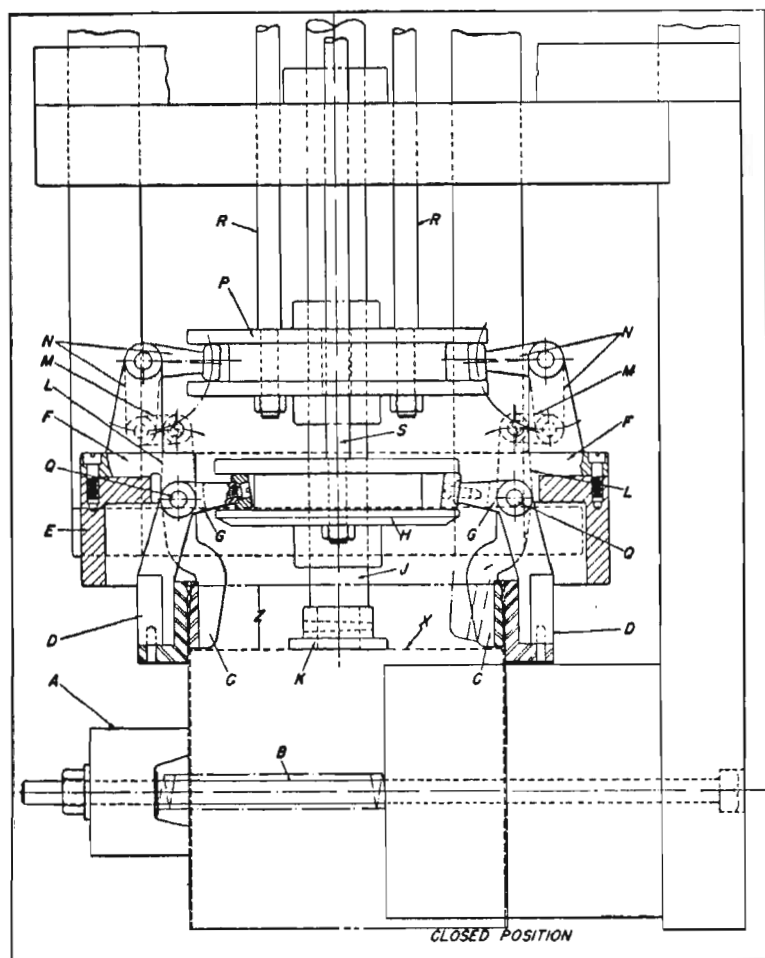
Mechanism Designed to Crimp Ends of Heavy Paper Cylinders as Shown in Fig. 9.
